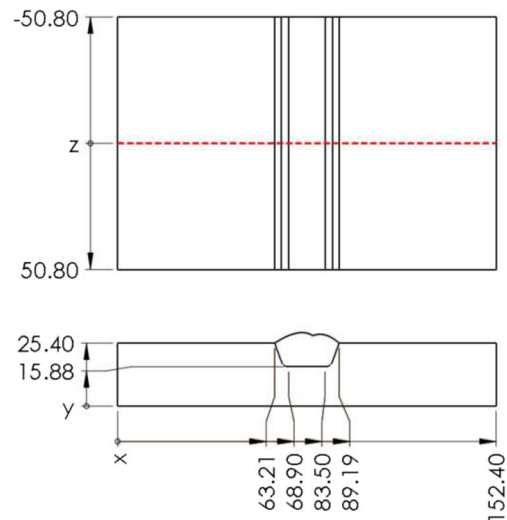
Titanium electron beam welded plate dimensions and measurement location (dimensions in mm)
